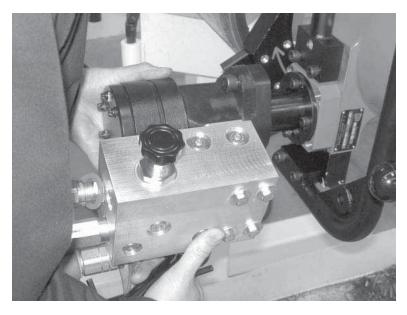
Mount the hydraulic motor flange onto the screws in the motor adapter.
